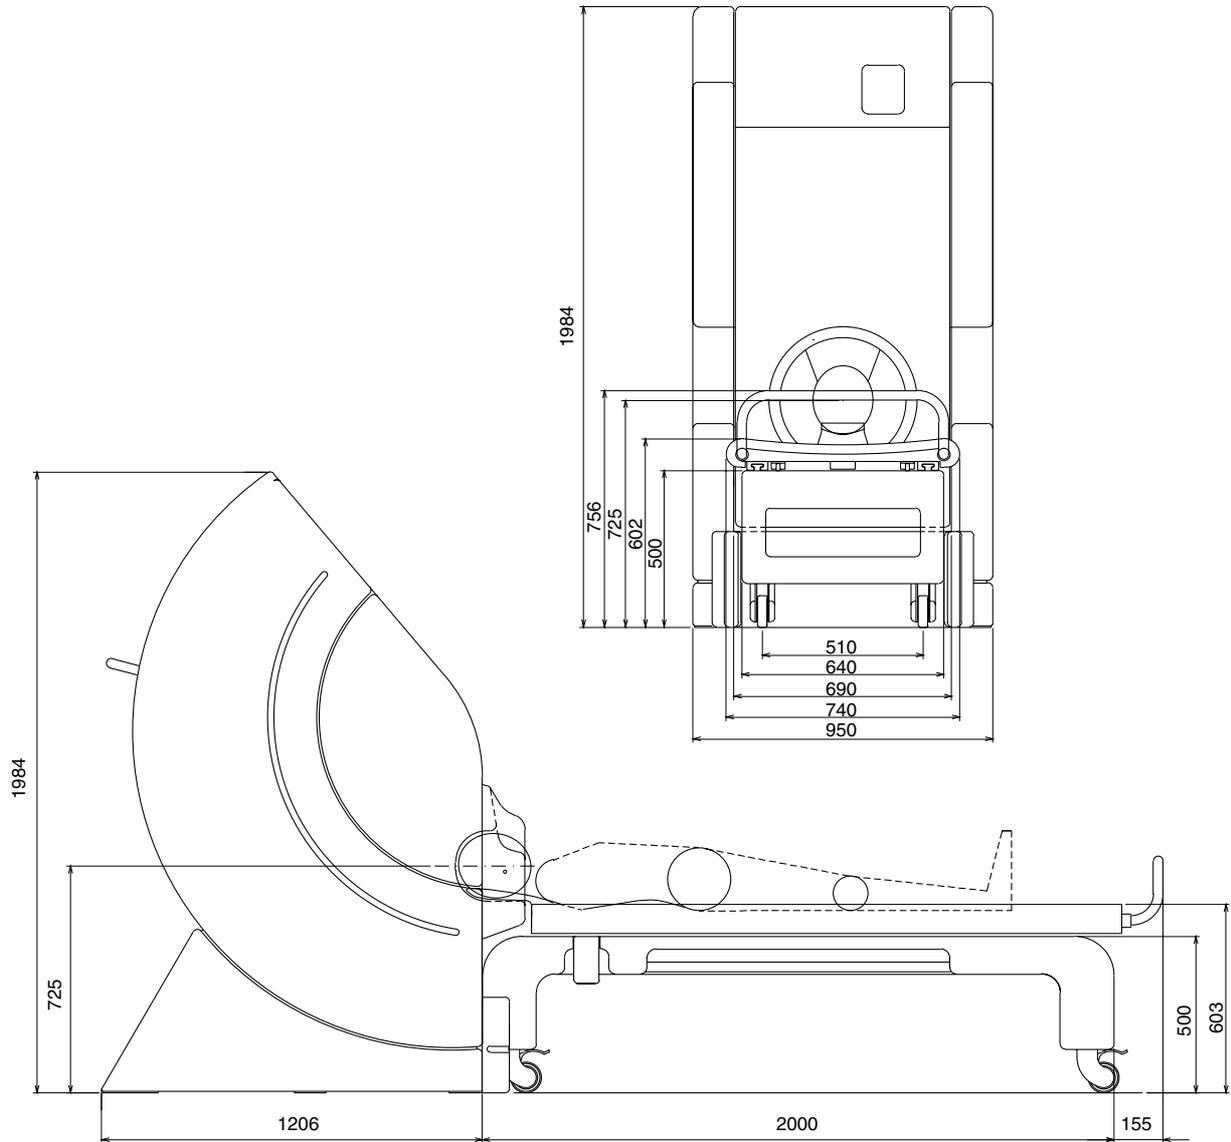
Gantry in supine position..Dimensions in millimeters.
